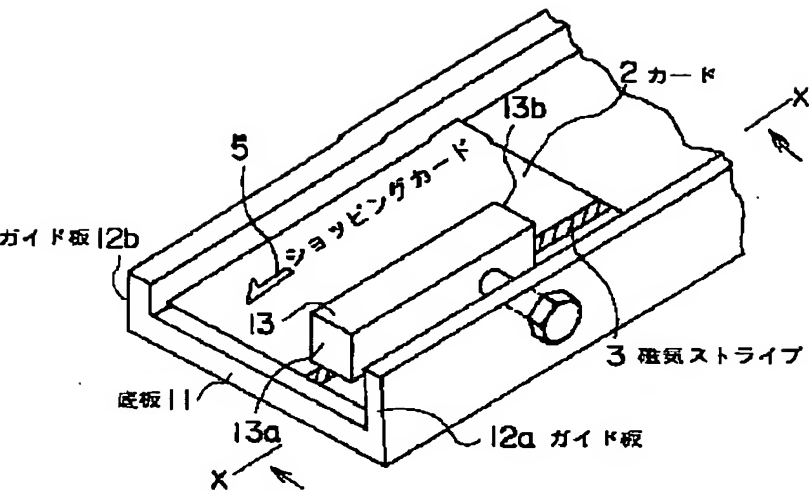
The top view taking out and showing the important section of an azimuth alignment device conventionally shown in drawing 9
